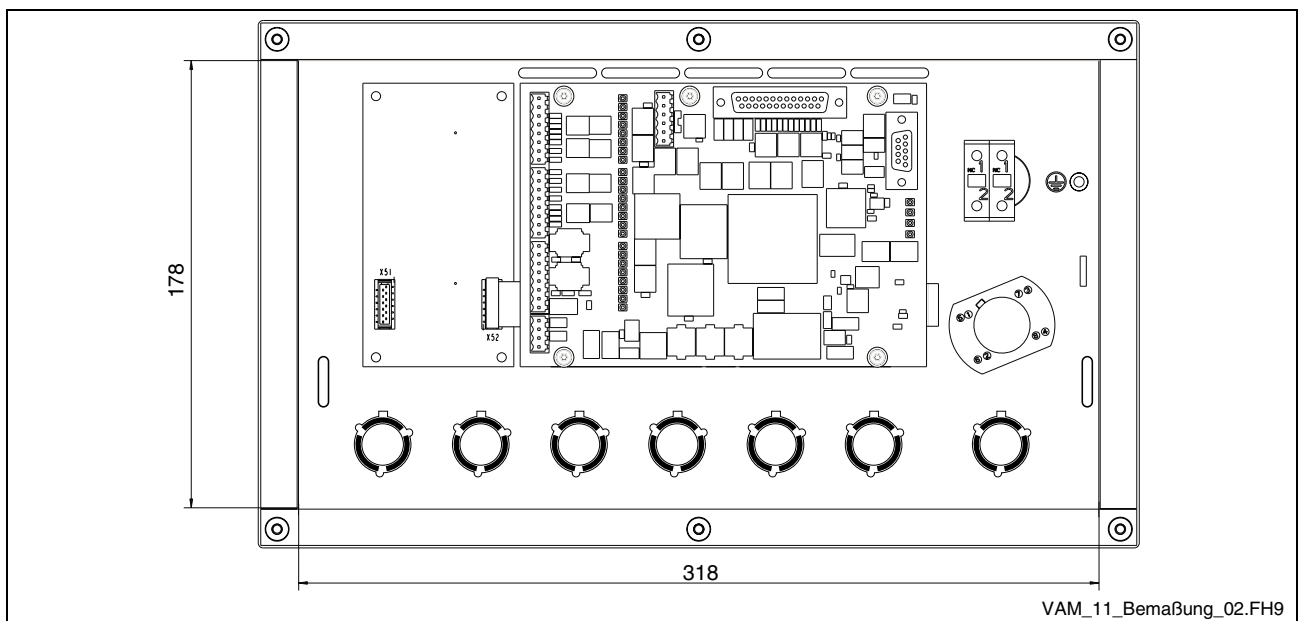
Housing dimensions VAM 11.1, rear view
